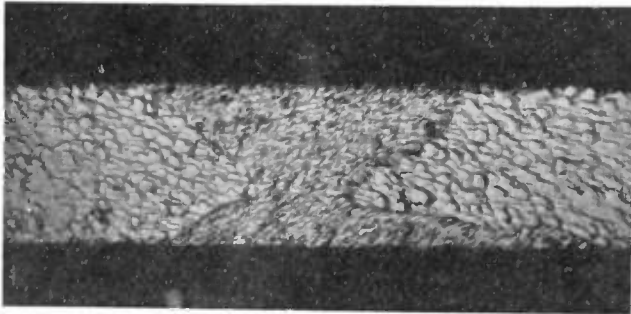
Cross section of CT-cut plate with lead soldered on both sides.
